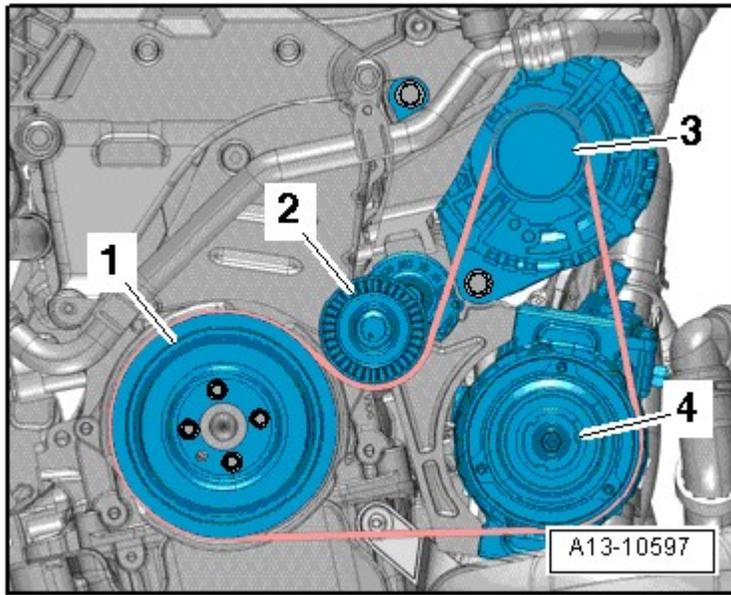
Identifying Vibration Damper, Belt Tensioner, Generator And A/C Compressor
